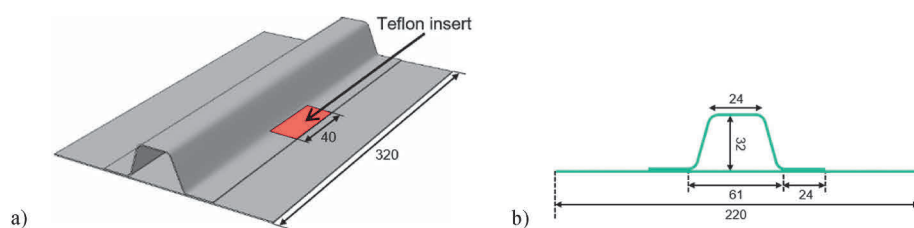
Single-stringer composite specimen: a) isometric view; b) cross-section. (All dimensions in millimeters)
